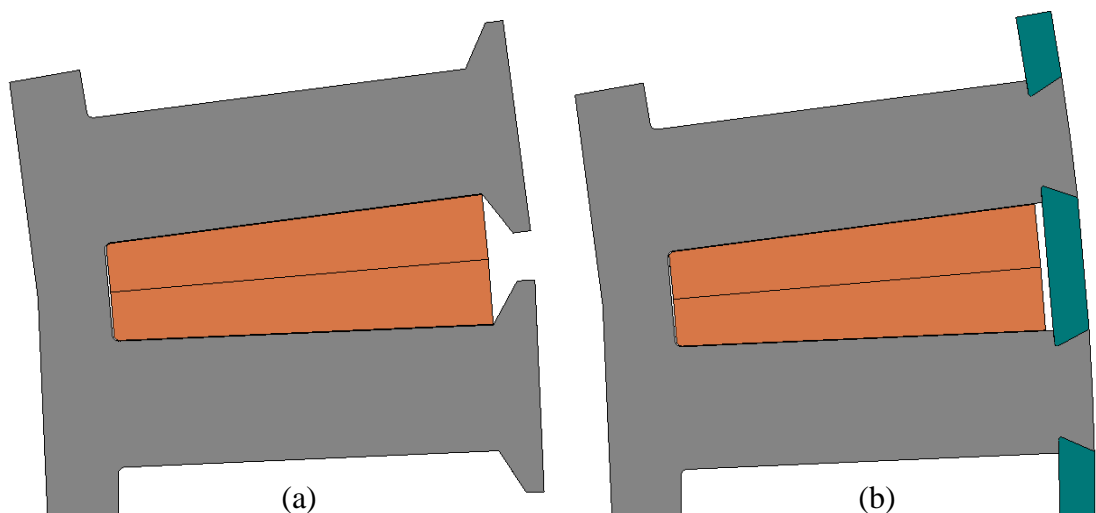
Slot wedge tooth penetration and tooth tip design.
